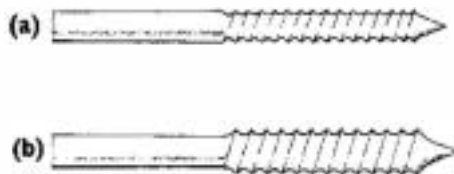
(a) Conventional (negative) threaded pin. (b) Positive threaded pin. Note reduction of shaft diameter at the thread-pin interface in the conventional pin.
